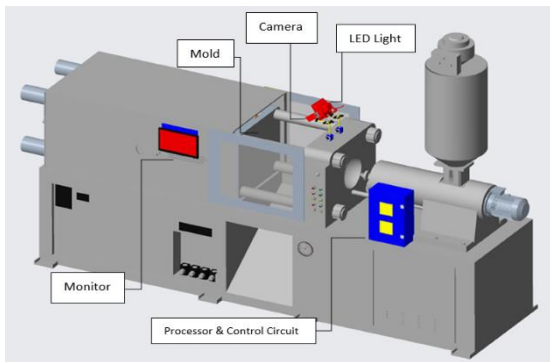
Injection molding machine (gray parts) and our inspection system (colorful parts) [15]
